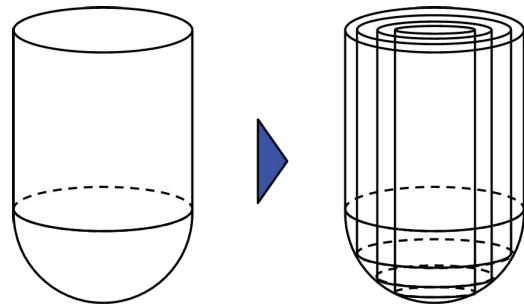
Ball end mill expressed by the superposition of square end mills.
